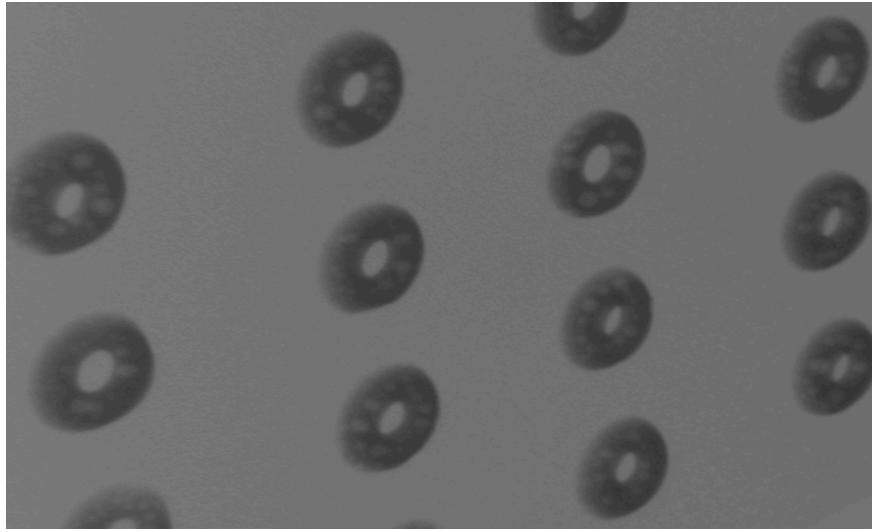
X-ray image of air-gap C4 fluidic I/Os after assembly.
